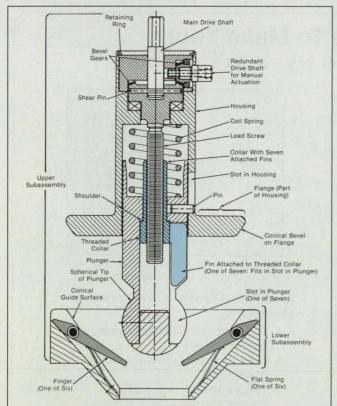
The Self-Aligning Truss-Joint Mechanism can be actuated by a single motor or manual rotary drive. Each subassembly is connected permanently to one of two structural components to be joined. This mechanism facilitates quick assembly and disassembly and may be suitable for robotic operation.
